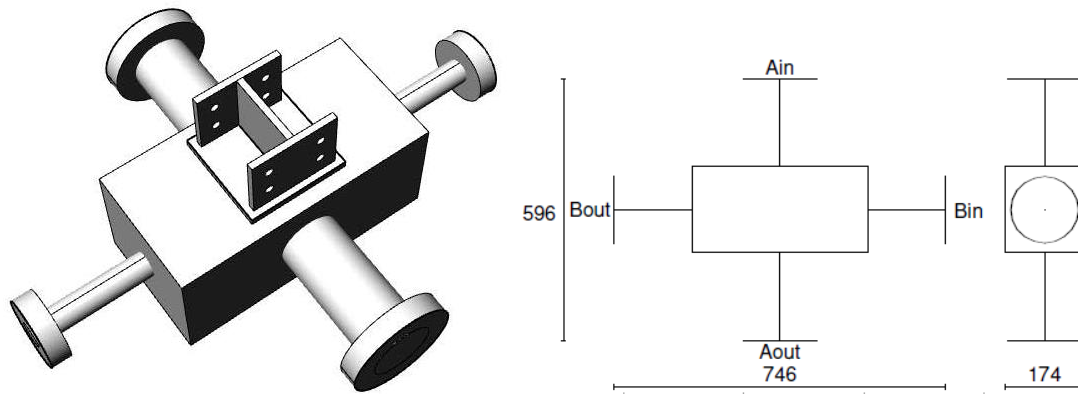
Hydraulic oil heat exchanger model and dimensions [4].
